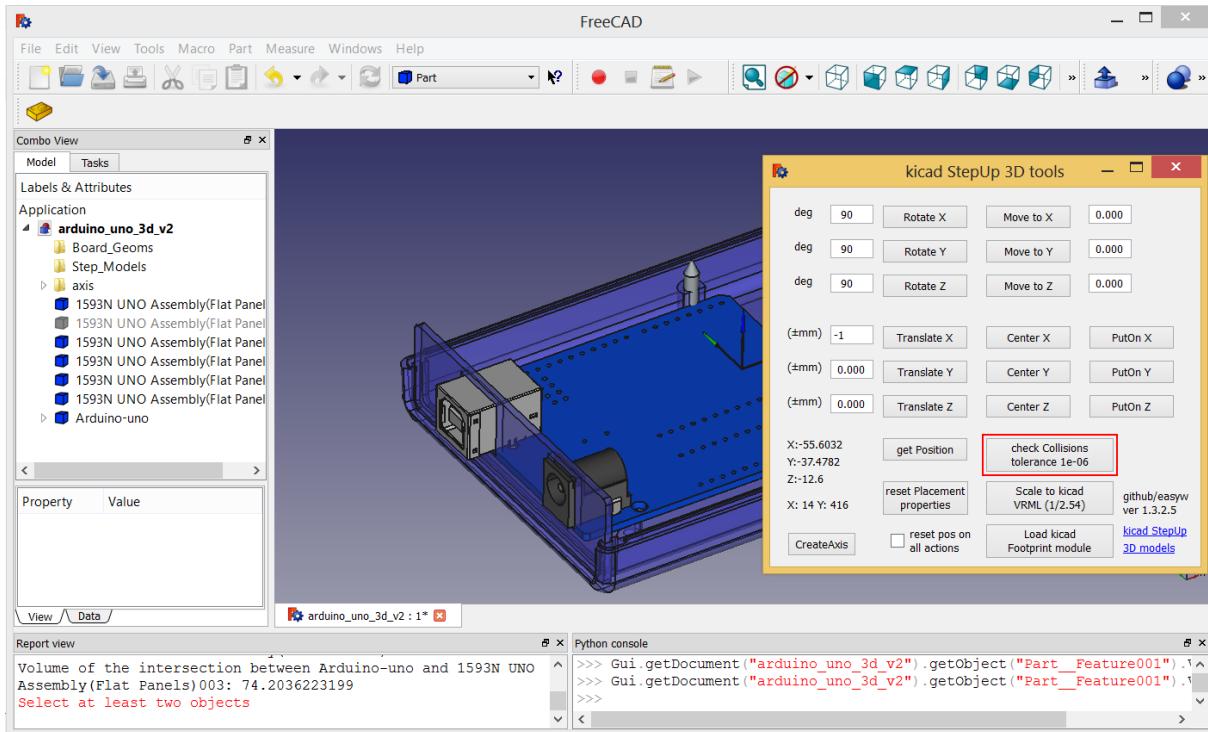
kicad StepUp tools: collisions check for 3D pcb and connectors with Arduino-uno-enclosure
